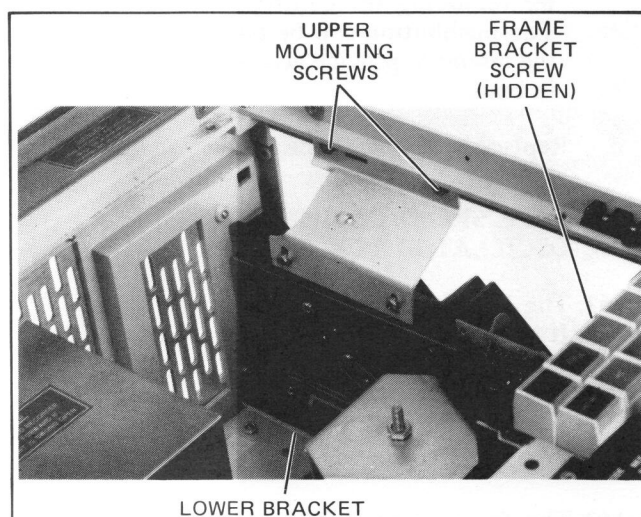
Motor Driver/ +5V(A) Regulator Removal
